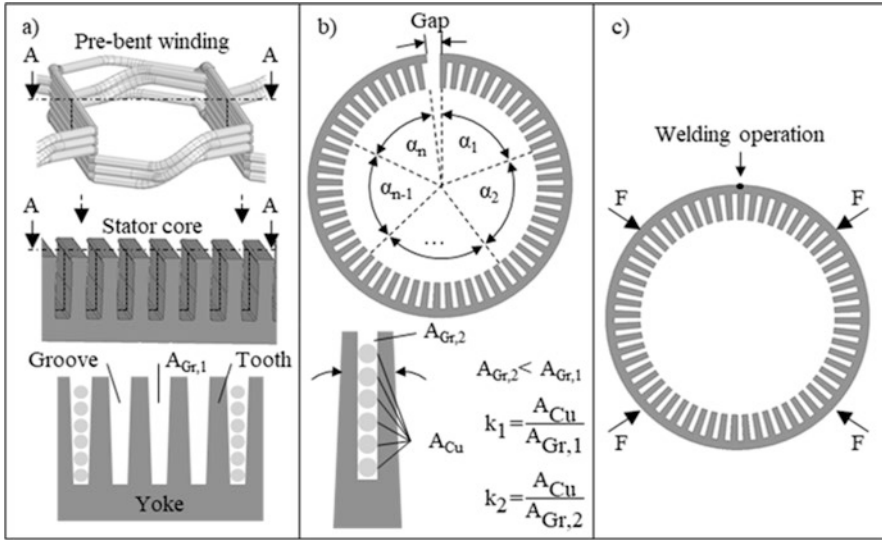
a) Insertion of pre-bent winding into stator core; b) Reduction of groove section during multi-stage bending operation; c) Welding operation
